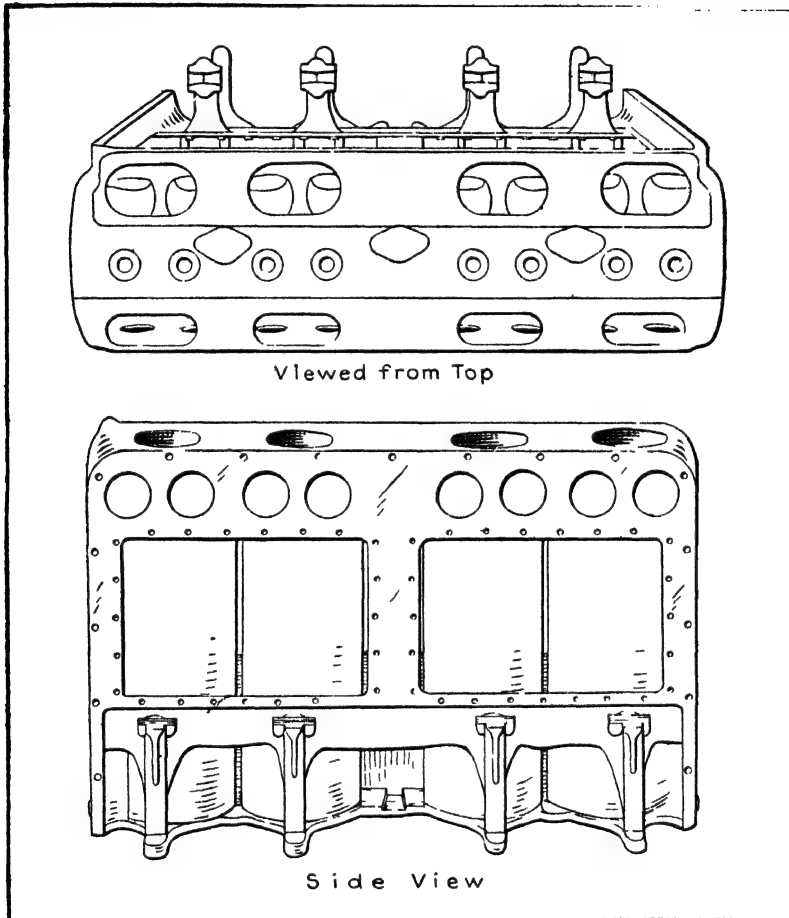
Views of Early Four-Cylinder Deussenberg Airplane Engine Cylinder Block.
